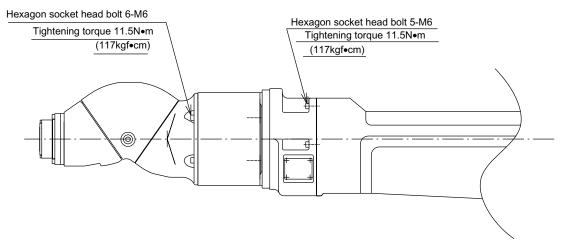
Wrist Fixing Bolts (for PX2850-B20)
